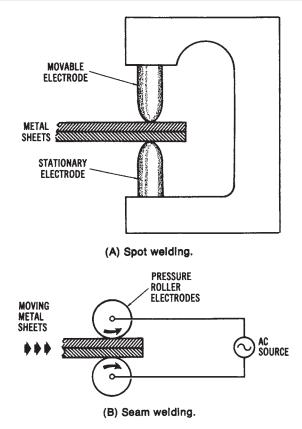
Resistance welding methods: (A) Spot welding, (B) Seam welding
